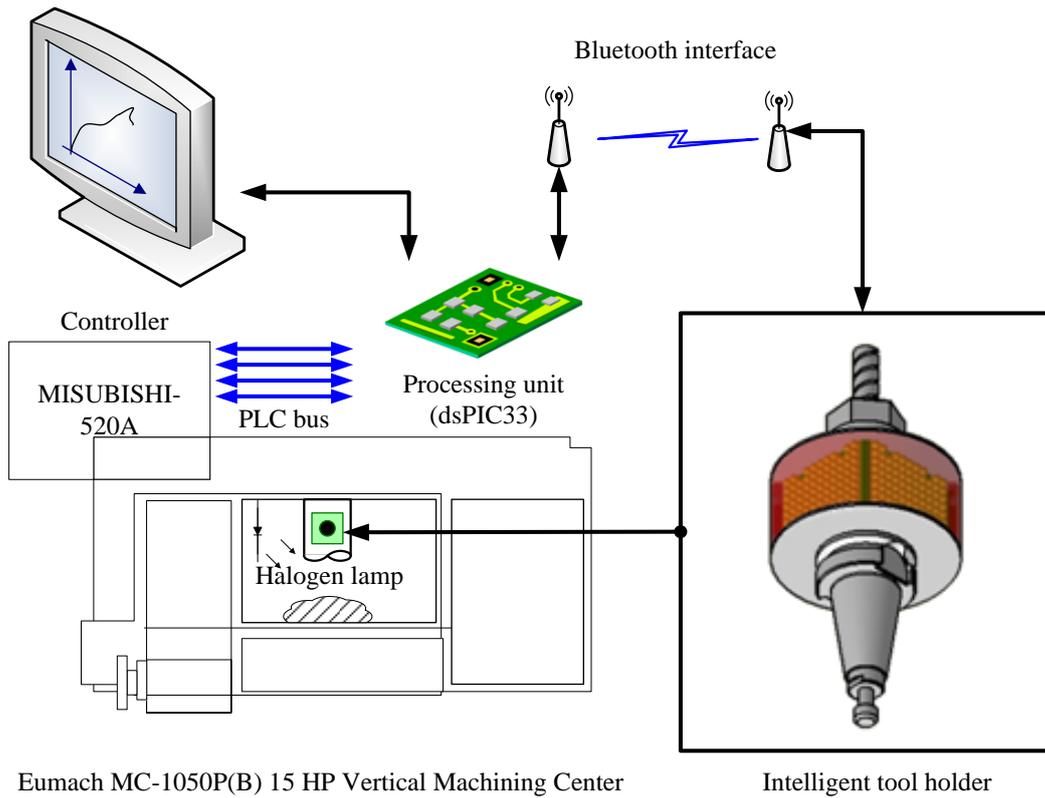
The proposed low cost sensing system comprises solar power board, a wireless communication module, a FFT processing unit, and an internal sensing device, and is capable of monitoring the working state of the machine tool holder in real time.
